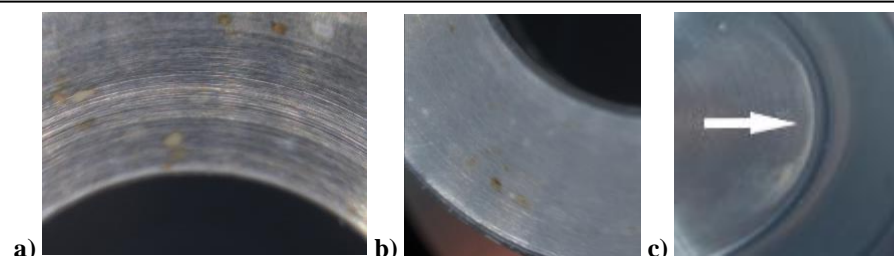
a) Tri-clamp ferrule, b) VCO tube gland, and c) VCO plug after 19 weeks immersion and five assembly/disassembly cycles (the white arrow points toward the damaged/delaminated area).
